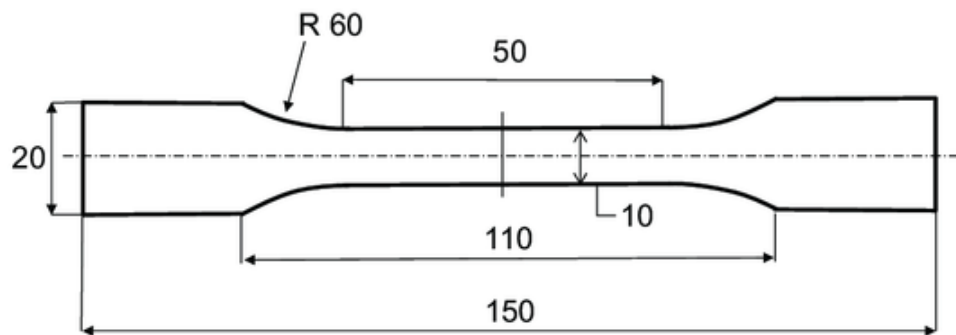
ISO 527-2 standard tensile specimen (dimensions in mm).
